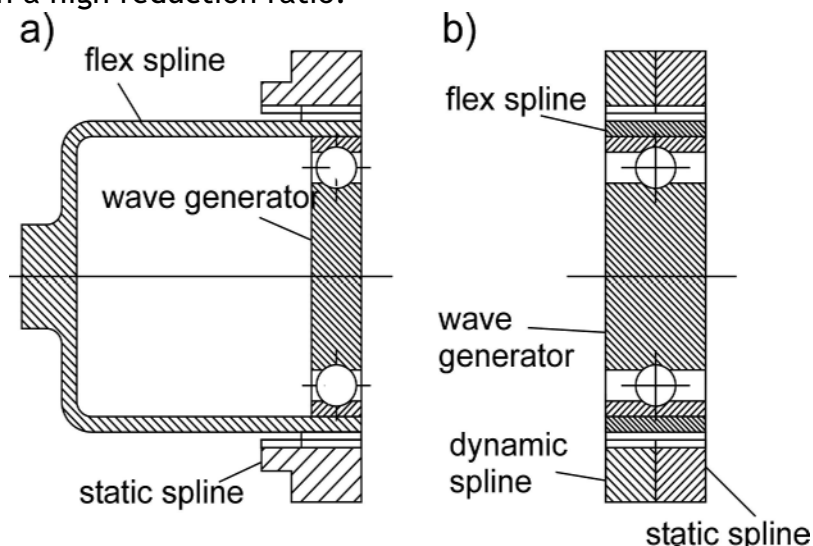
Versions of the Harmonic Drive[®] gear:
